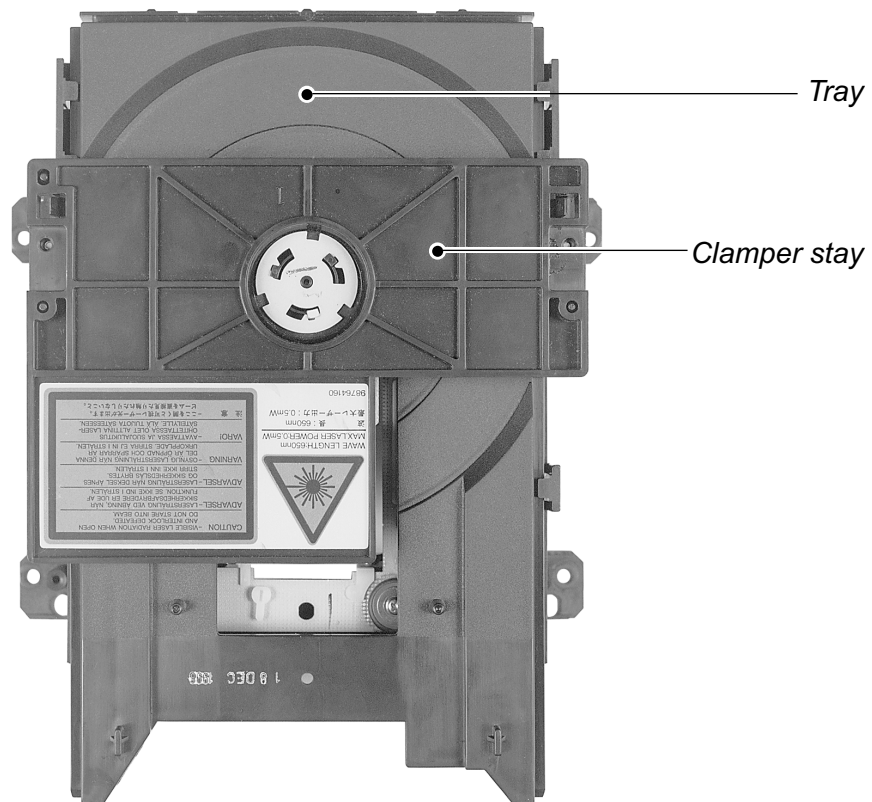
Mechanism chassis assembly (Top side)
